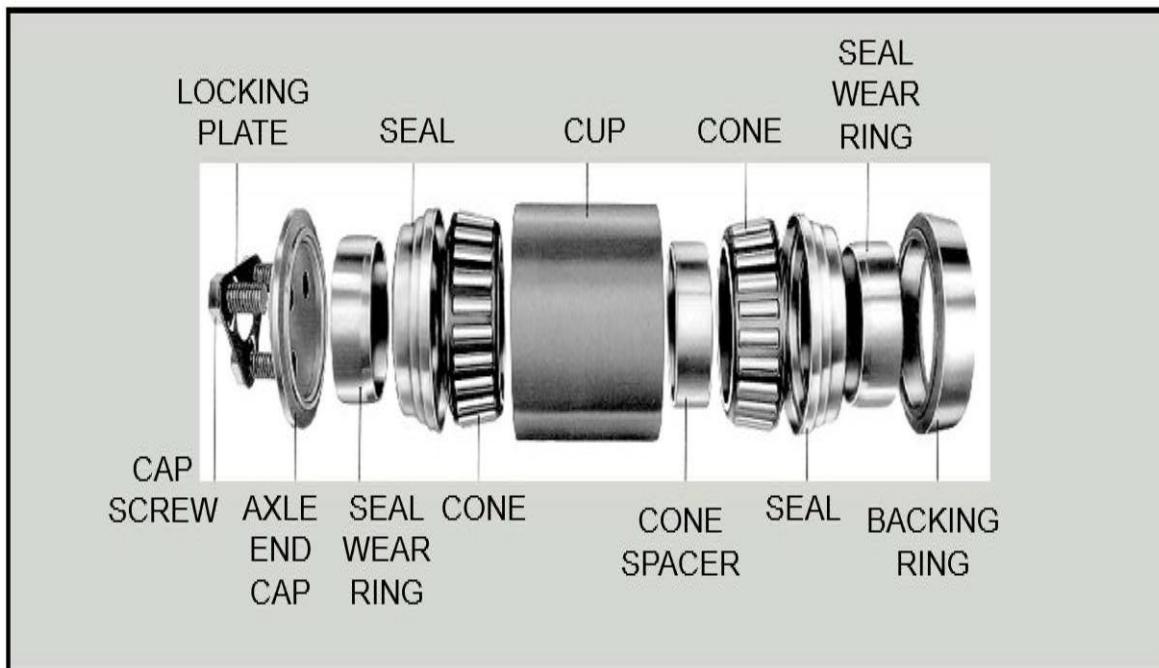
Expanded View of Cartridge Tapered Roller Bearing
